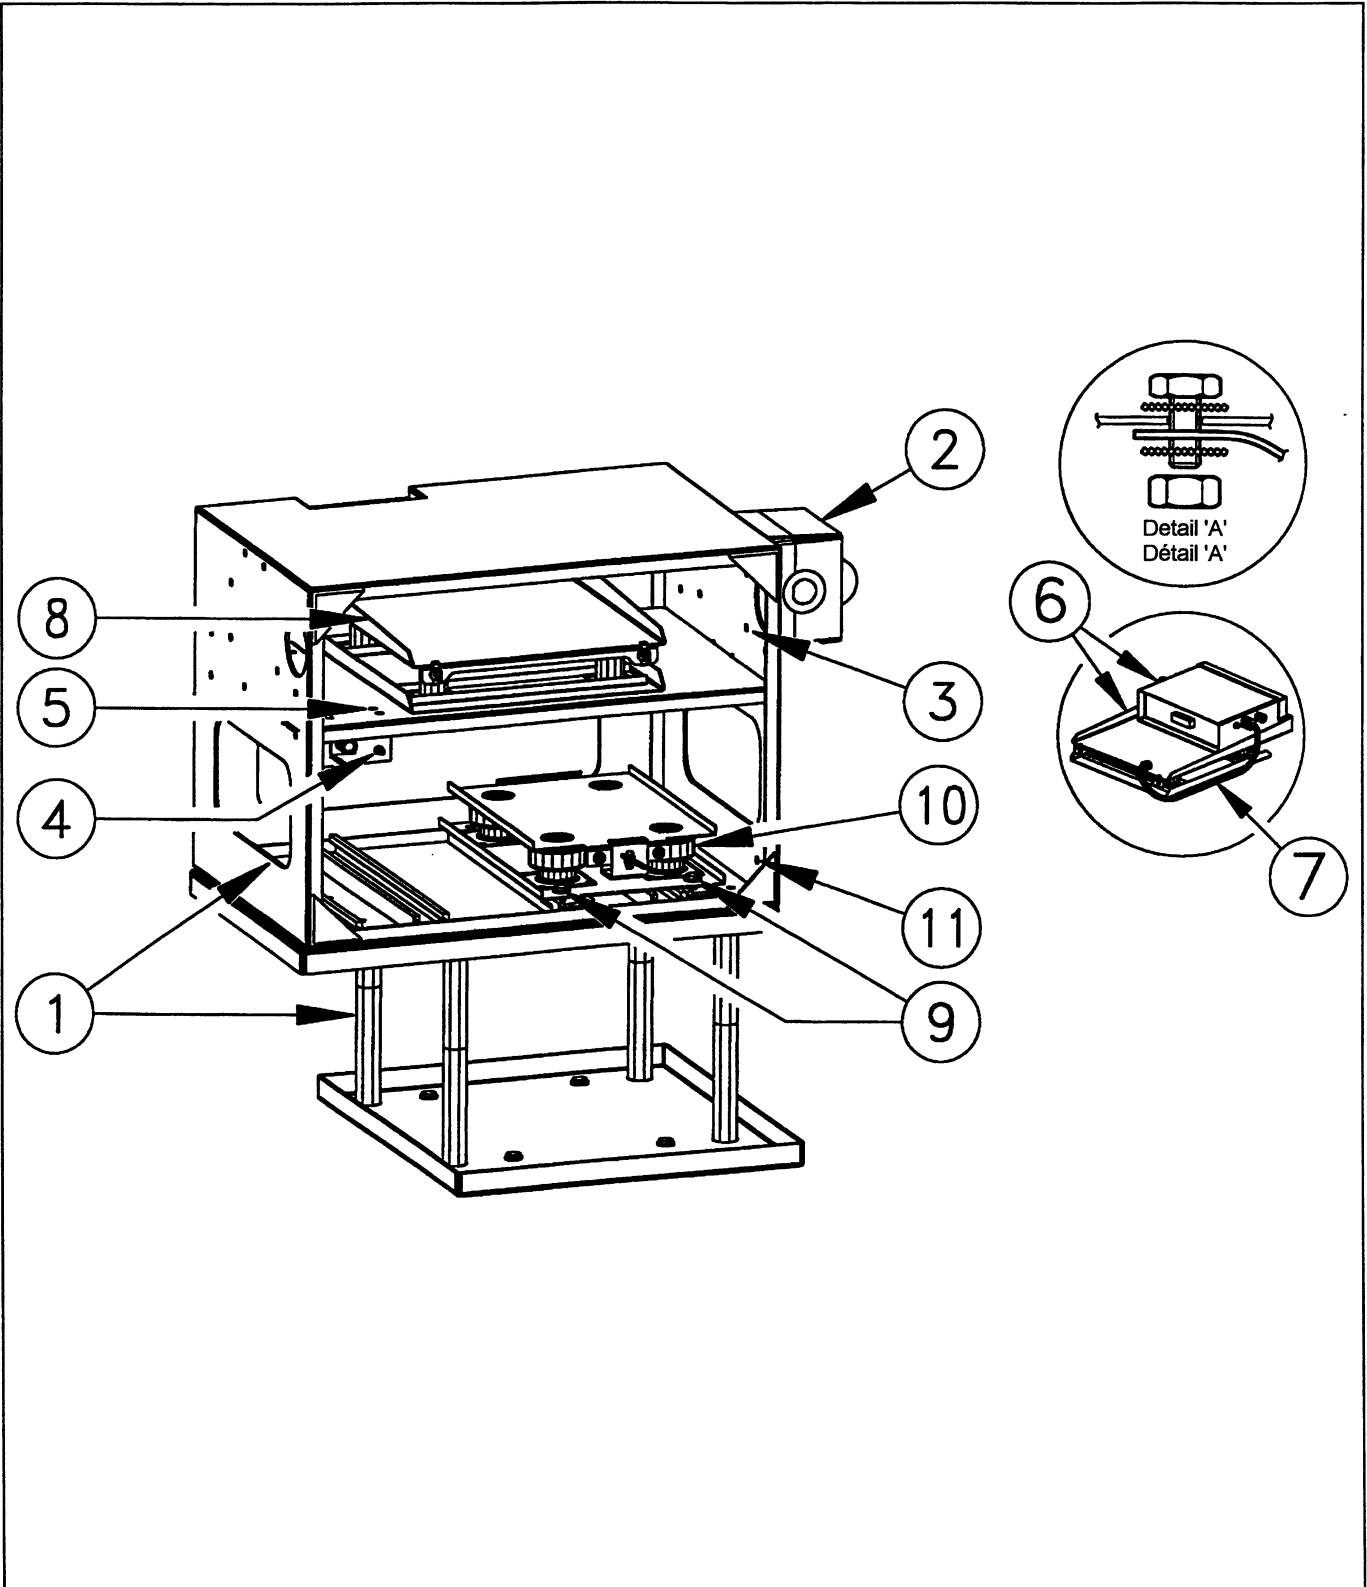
(Sheet 1 of 4) Ancillary Equipment Installation
